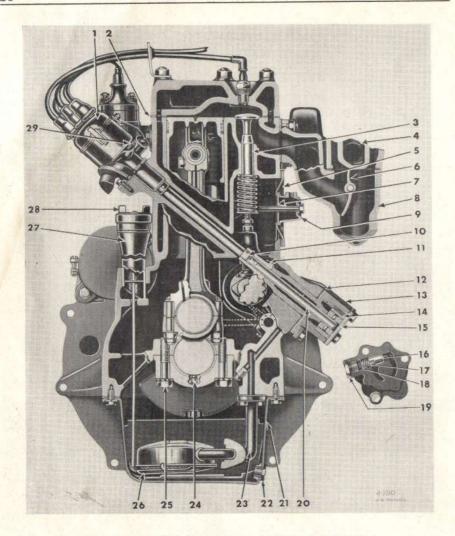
FRONT SECTIONAL VIEW OF ENGINE
